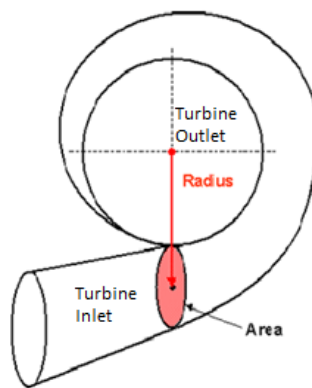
Illustration of Turbine Housing to Show A/R. Adapted from [27].
